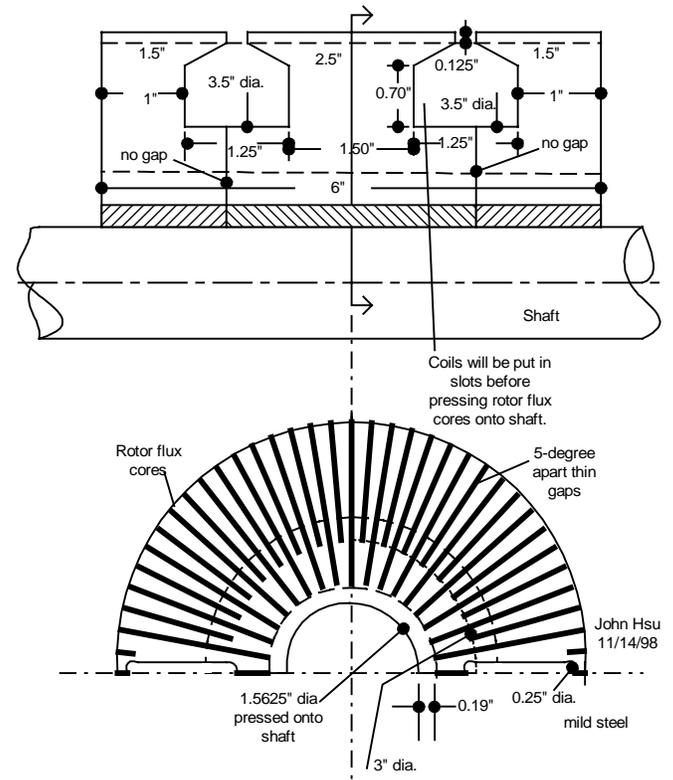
Solid rotor core with slits for a HSU prototype machine.
